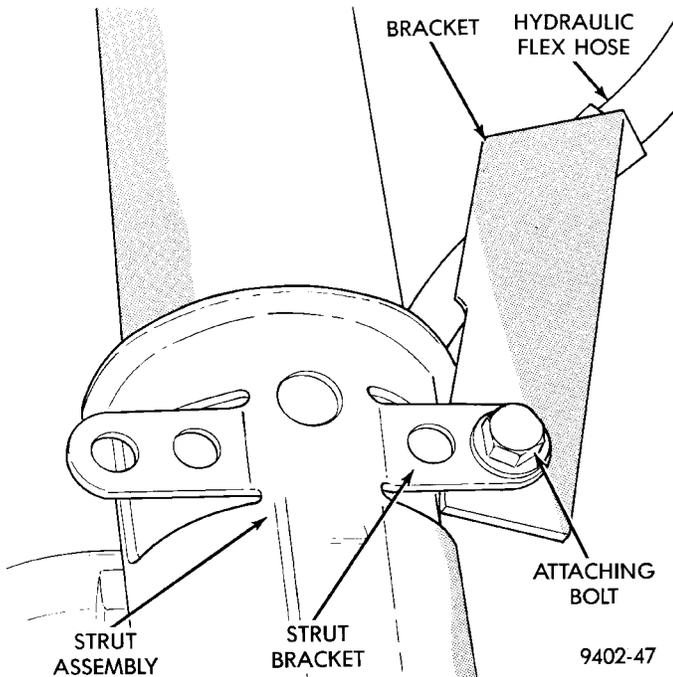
Hydraulic Flex Hose Bracket Attachment To Strut
